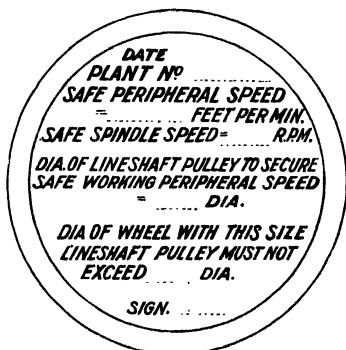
TYPICAL DISC FOR AFFIXING TO GRINDING MACHINE
